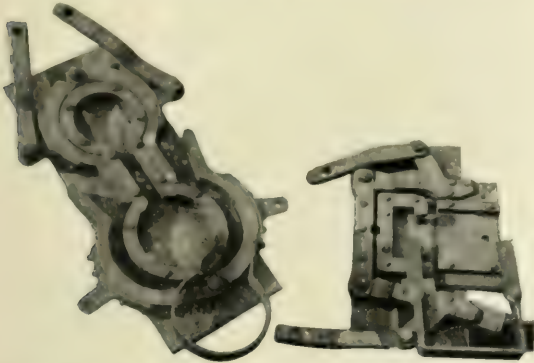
Two Typical Tools Used on a Large Air Press, or Bulldozer.
